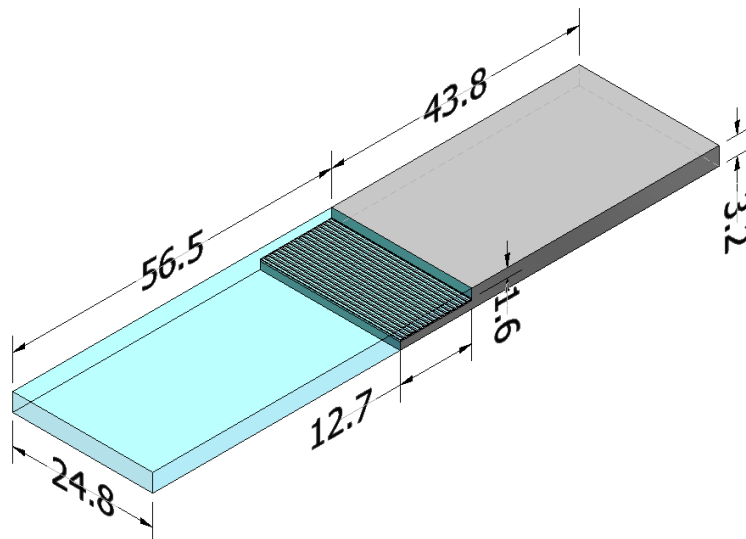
Geometry and dimensions of the injection overmolded PC/AA6061 hybrid joint specimens. AA6061 in light gray. Dimensions in millimeters (mm).
